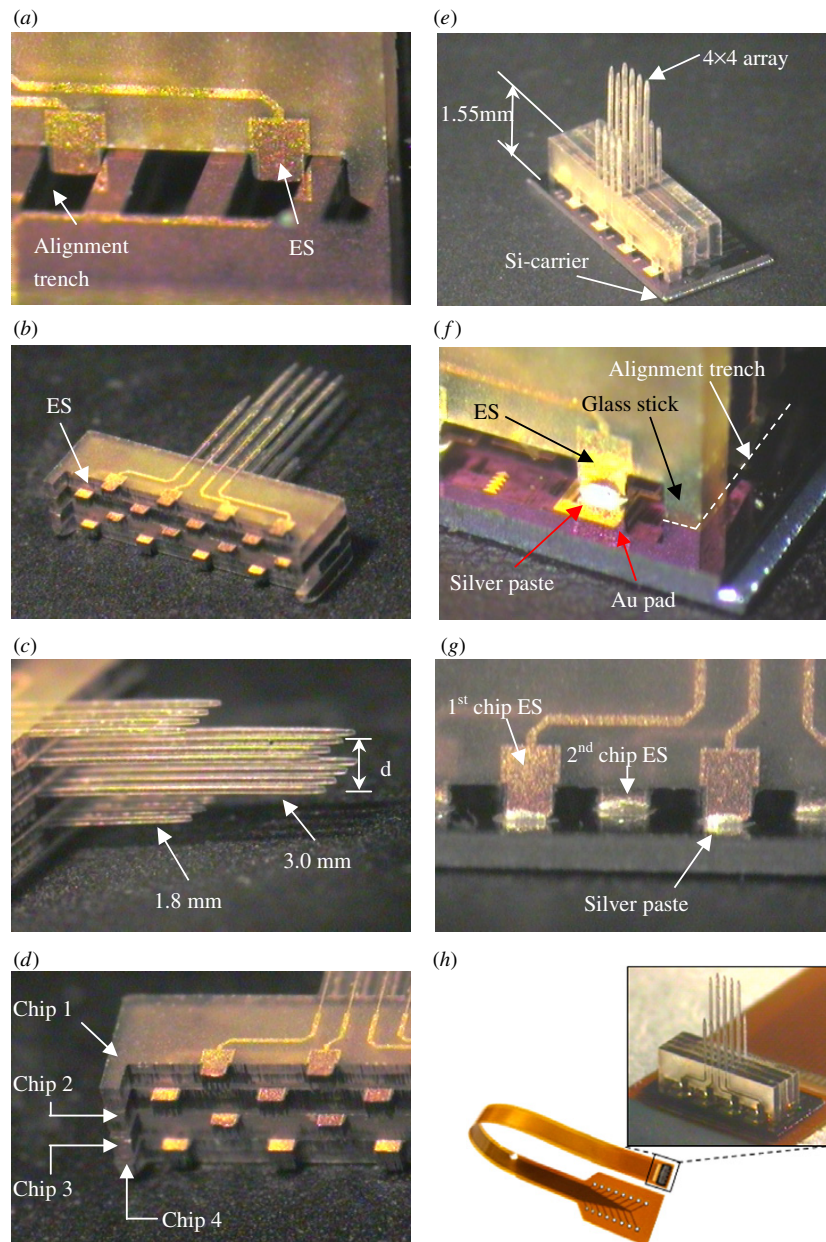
Assembling result of the 1st assembly (a)–(d): (a) ES and silicon fixture during 1st assembly, (b) typical 1st assembly result (4×4 microprobe array), (c) front-side view of the 4×4 microprobe array shows the integration microprobe with different shaft lengths. The distance between different microprobes (d) is defined by the base plate thickness, and (d) the back-side view of the 4×4 microprobe array illustrates the stacking of the microprobe arrays and the staggered arrangement of ES; and of the 2nd assembly (e)–(h): (e) 4×4 microprobe array and its silicon carrier. The thickness of the probe holder and the silicon carrier is 1.55 mm, (f) the glass stick and alignment trench on the silicon carrier ensure the alignment between the assembled array and the silicon carrier, (g) silver paste connects the ES and the silicon carrier with little outflow, and (h) a 4×4 microprobe array and Si carrier mounted on flexible PCB.
